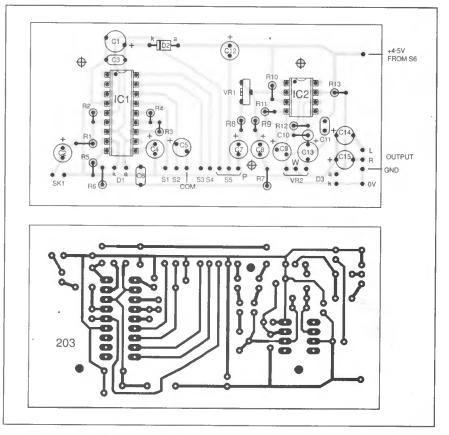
Printed circuit board component layout and full size underside copper foil master pattern for the Voice Processor.
